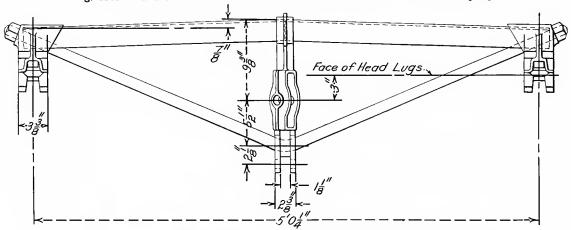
Buffalo Truss Brake Beam No. 3. Buffalo Brake Beam Company.
